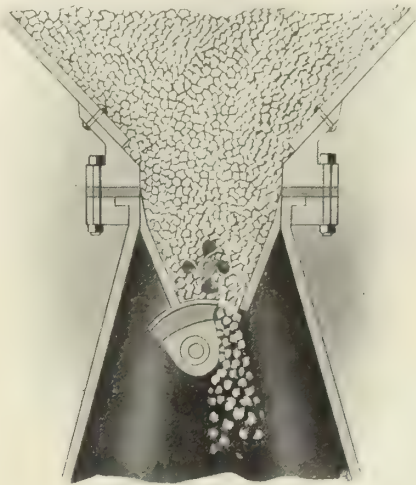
CARBIDE FEED VALVE PARTLY OPENED
